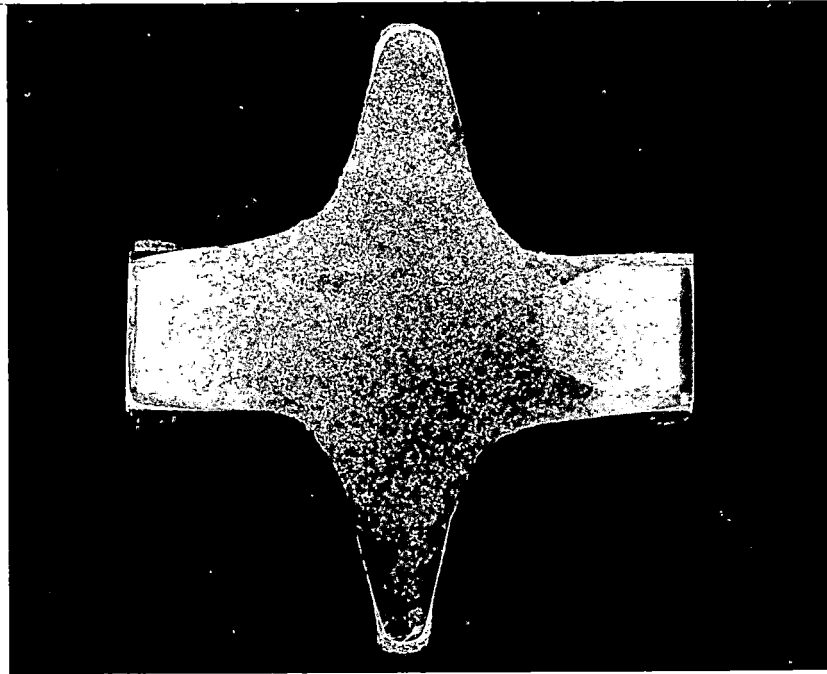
Section from weld #T-1 showing complete fusion - typical of U. S. Thermit welds.
